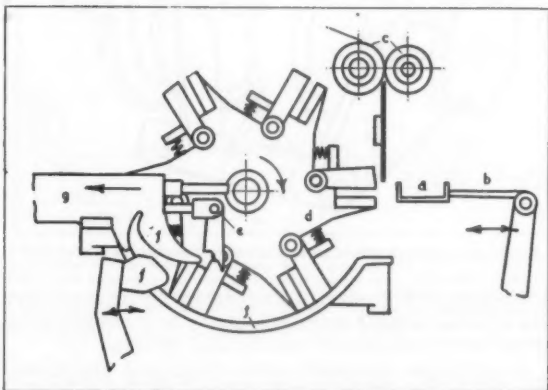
Rotary head of mould wheel type of machine; rest periods are controlled by Geneva wheel, index cam, etc. a, feed belt; b, pusher; c, wrapper feed; d, article holder; e, ejector; f, folder; g, discharge channel
